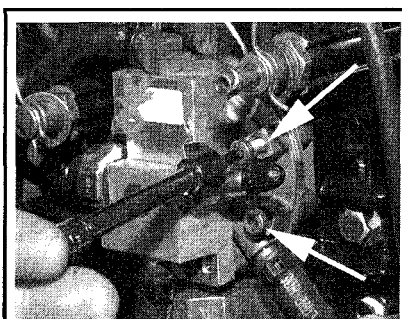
and the 4 oil pump bolts (2 on each side)
